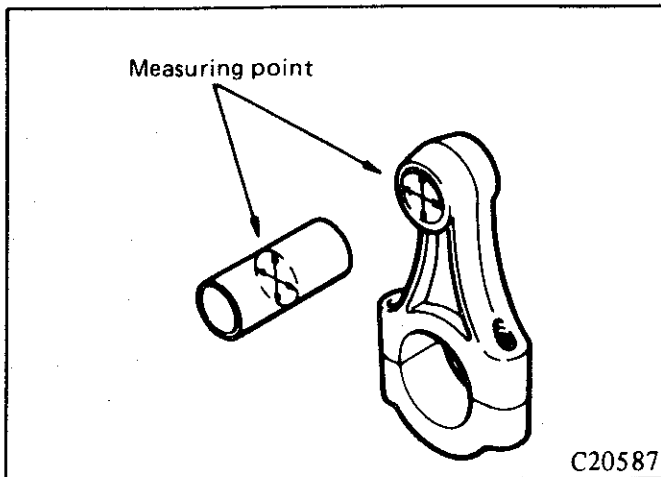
Measuring piston pin-to-connecting rod small end clearance
